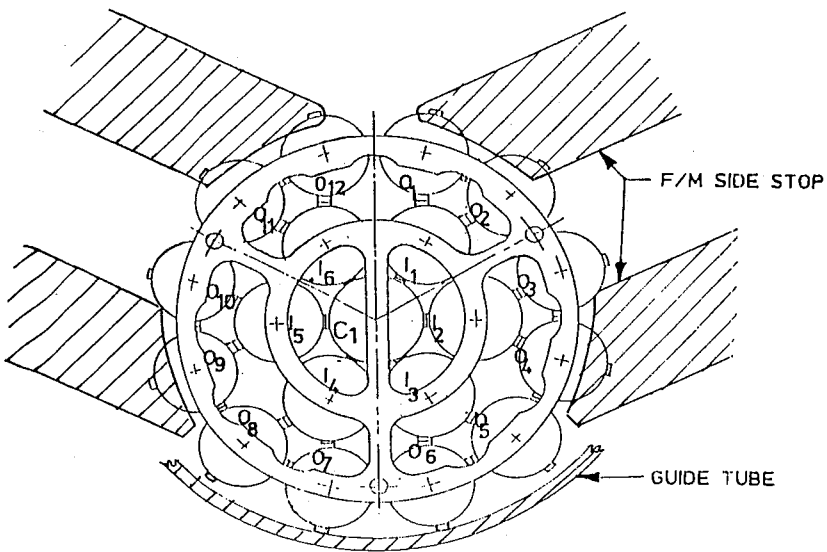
Location of F/M side stop w. r. t. bundle resting on two pins in guide tube
